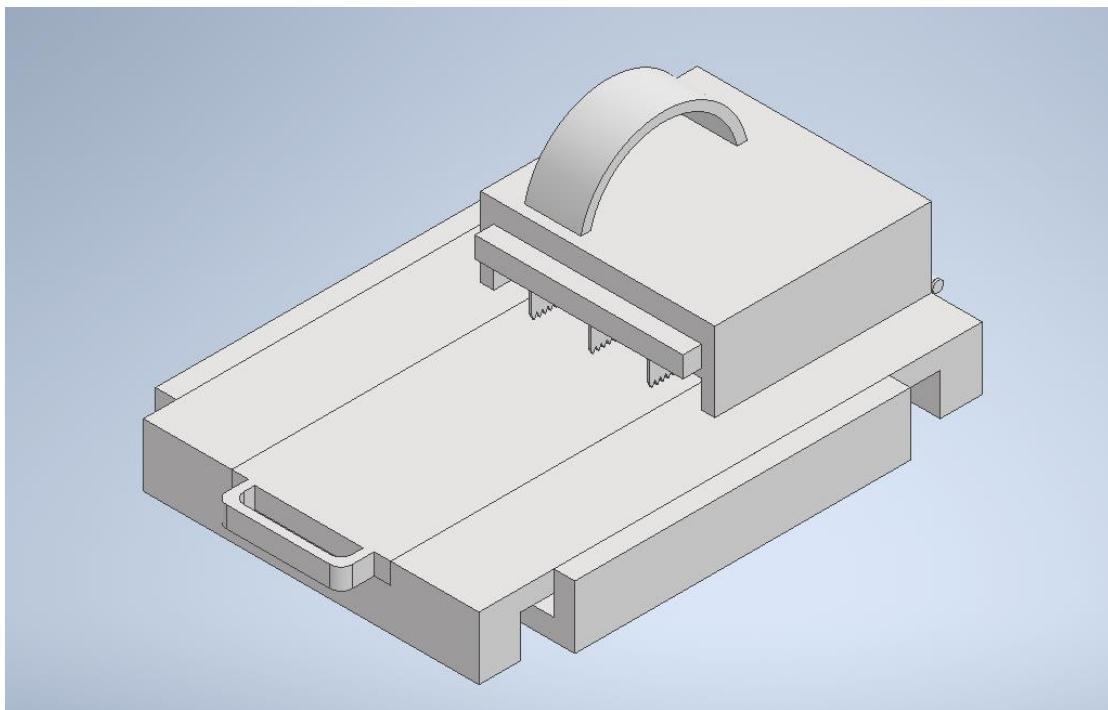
Assembly in Inventor of all of our prototype's components with correct measurements
